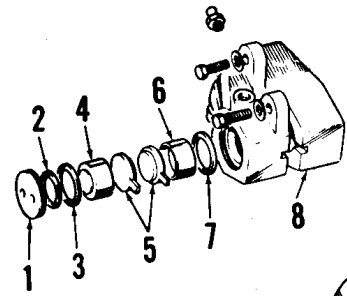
Exploded view of hydraulic brake master cylinder used on later Commando models.
